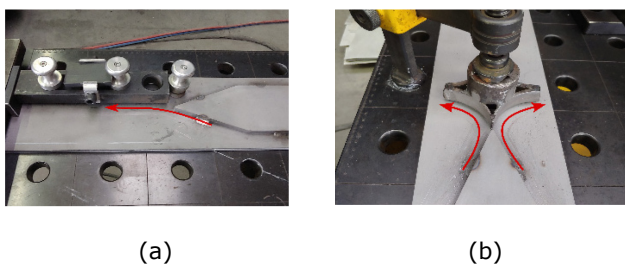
Templates for the different extended weld courses: (a) straightforward, (b) swing to the sides.
